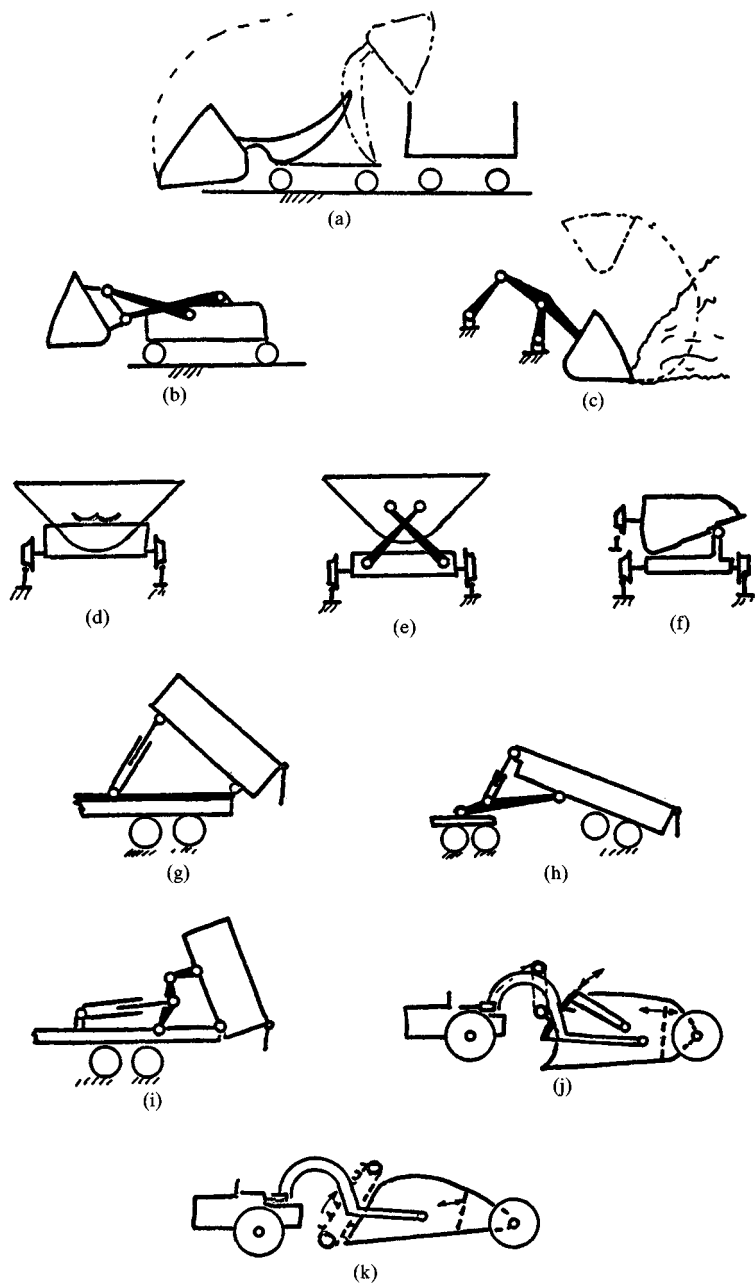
Loading and unloading mechanisms II. (a), (b) Mucking machines; (c) scooping mechanism; (d) to (f) dumping mine cars; (g) to (i) dump trucks; (j) motor scraper; (k) elevating scraper.
